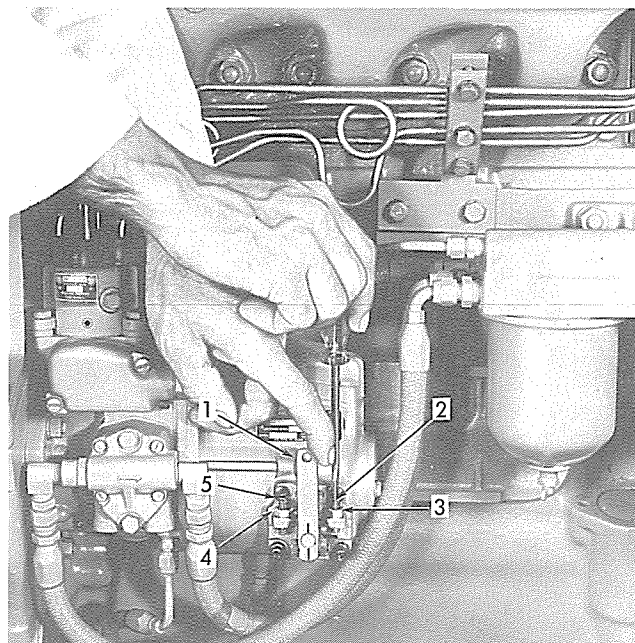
Adjusting Typical Governor Speed Control Lever Adjusting Screws (T-27642)
